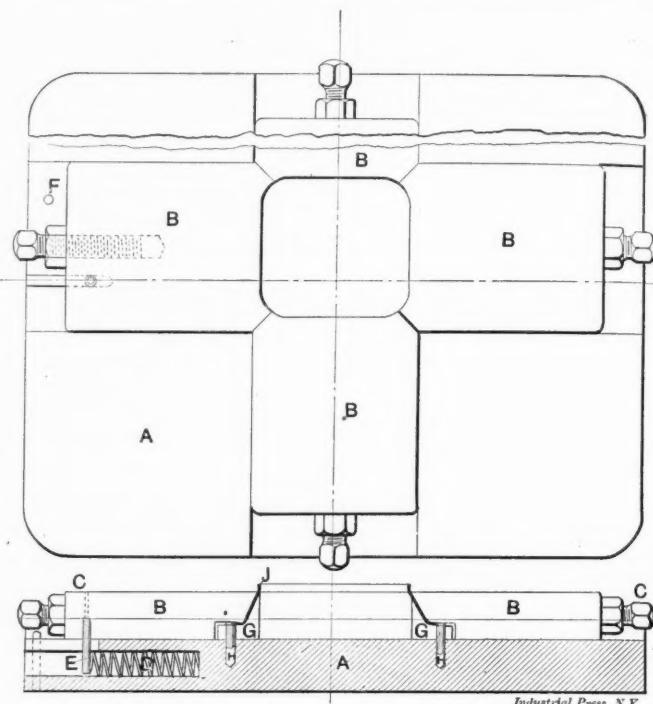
Plan and Sectional Views of Punch for Turning the Flange.
